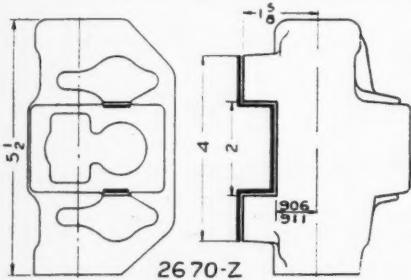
Drawing of piece shown in process in Figs. 1 and 2.
